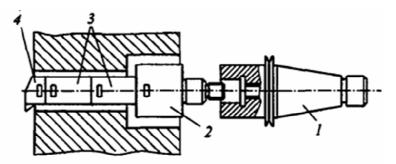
Tool boring block of standard modules: 1 – insert; 2 – extension; 3 – adapter; 4 – boring head
